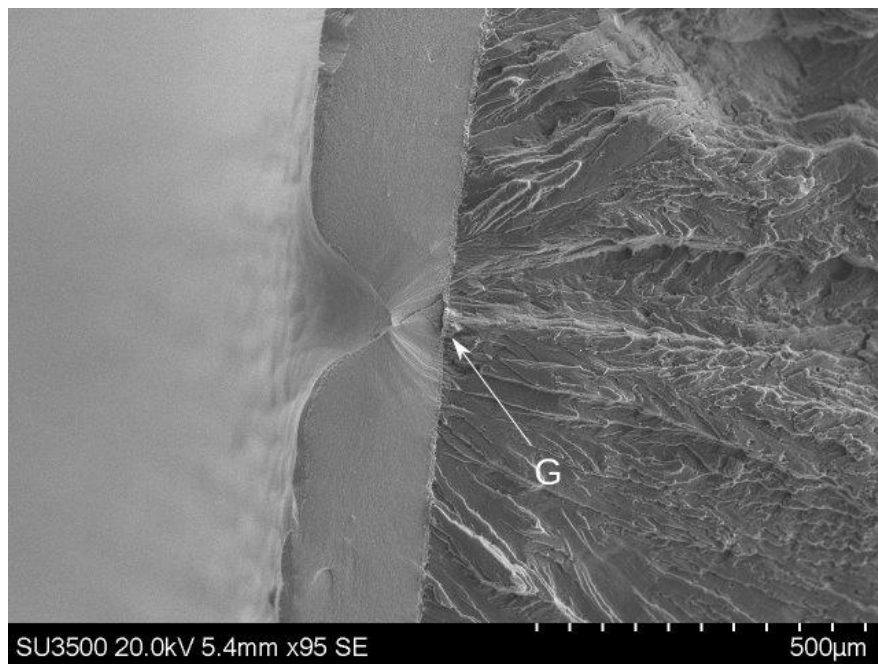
Indentation at location G in the coating of the fracture surface of Specimen H4.
